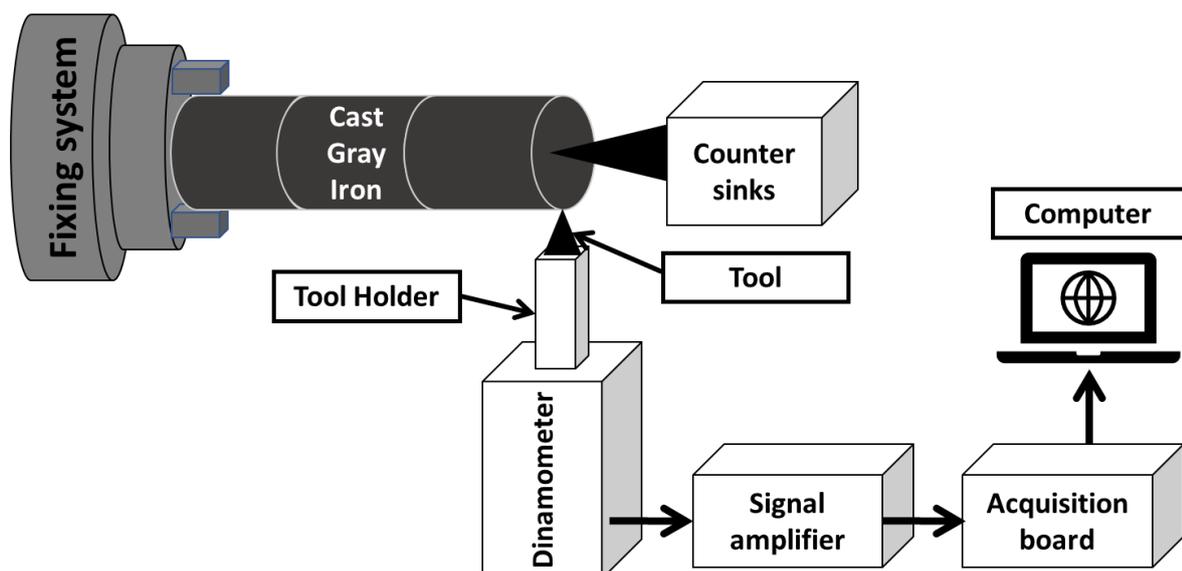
Acquisition system scheme using the dynamometer Kistler.
